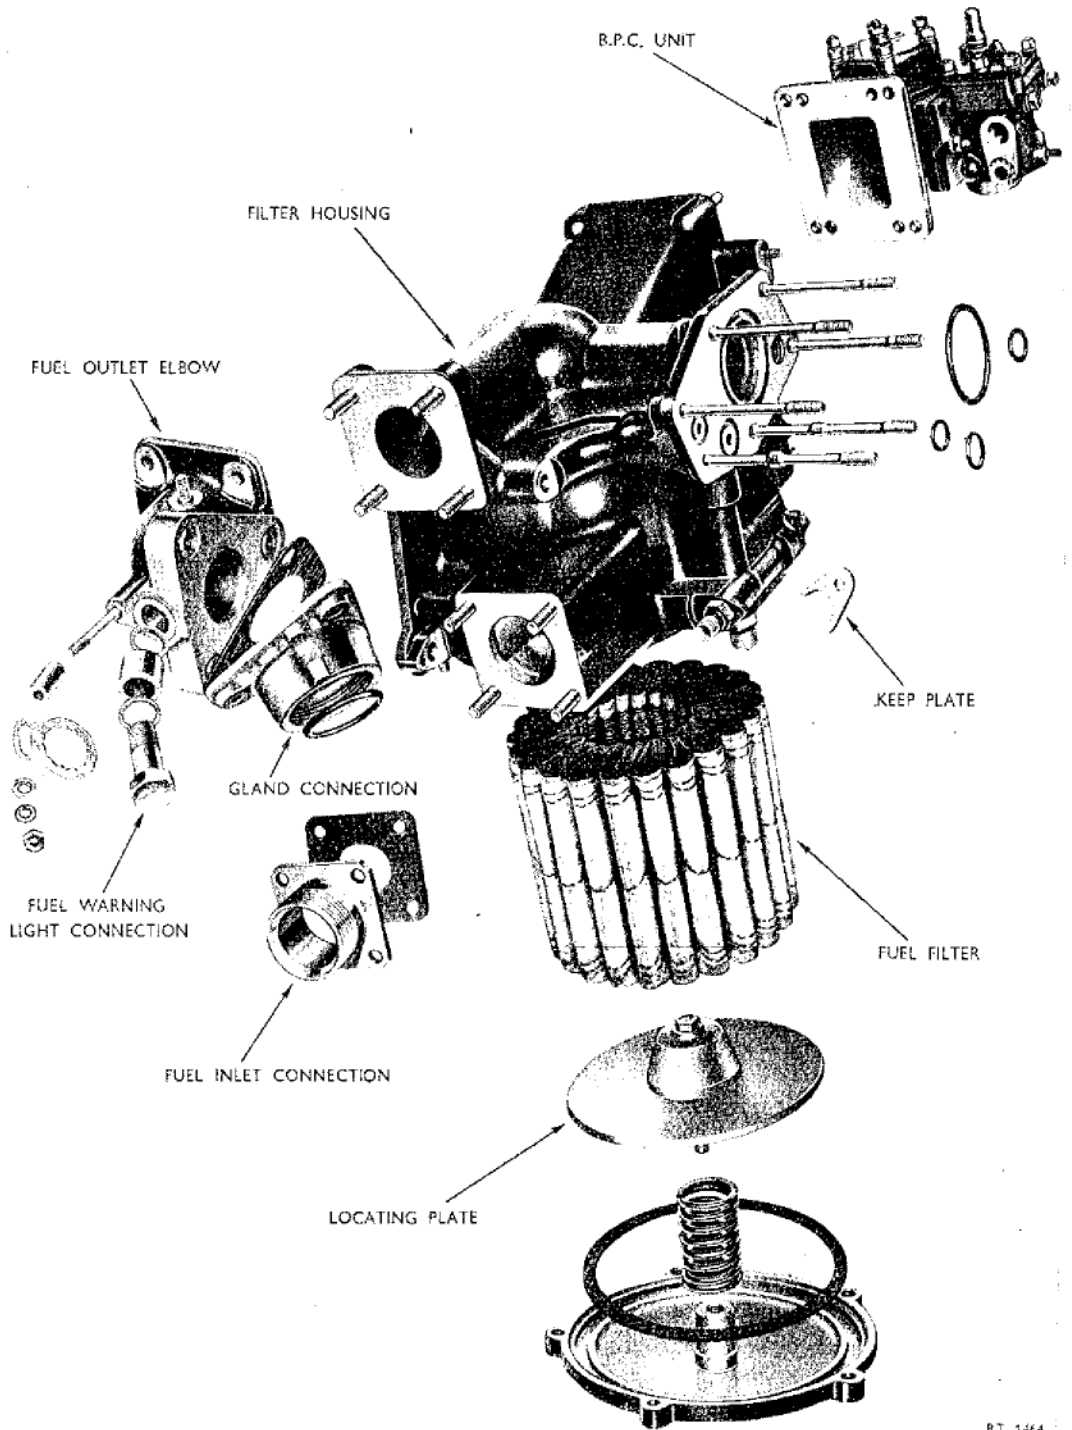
Exploded view of filter housing (F.C.U. type BA.61076, BA.60351, BA.62403, BA.73323)
